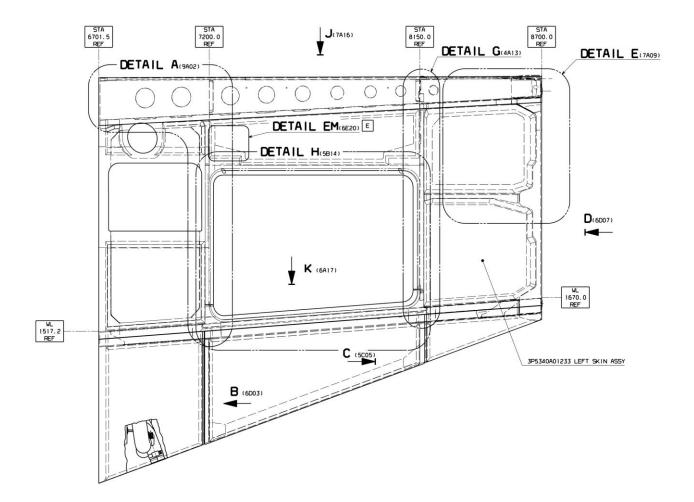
Baggage door locking installation – Detailed view and rivet list for Figure 1 thru Figure 2
